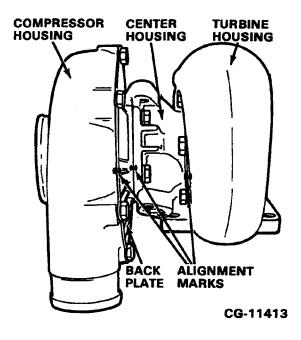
Mark Adjacent Components to Facilitate Reassembly
